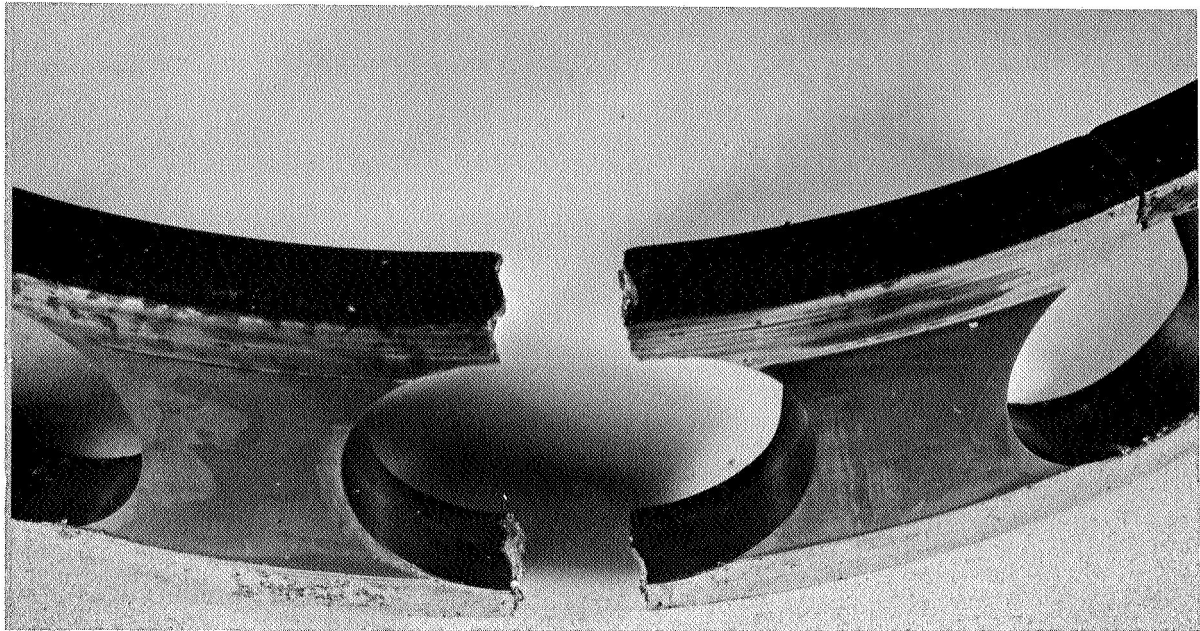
PRIMARY CAGE FAILURE - BEARING S/N 28
